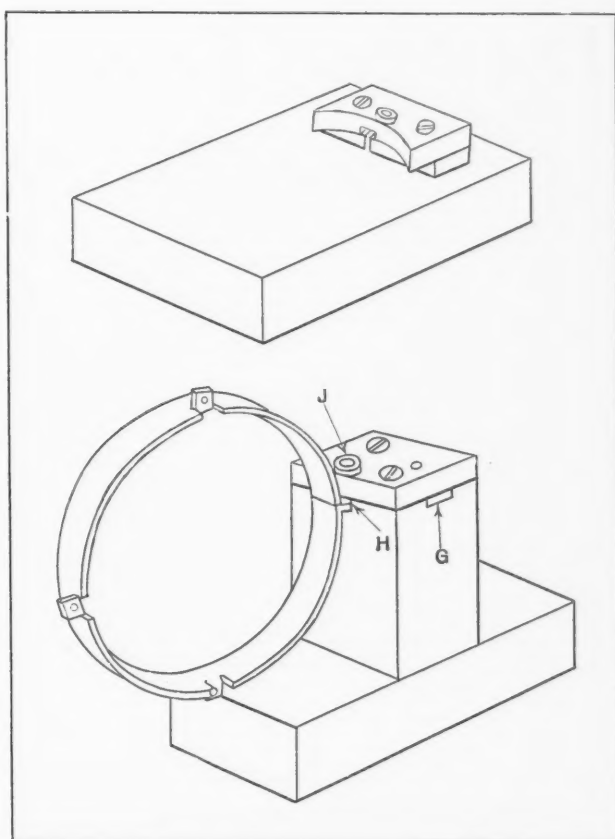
Jigs for Bending and Drilling Retainer Ring
